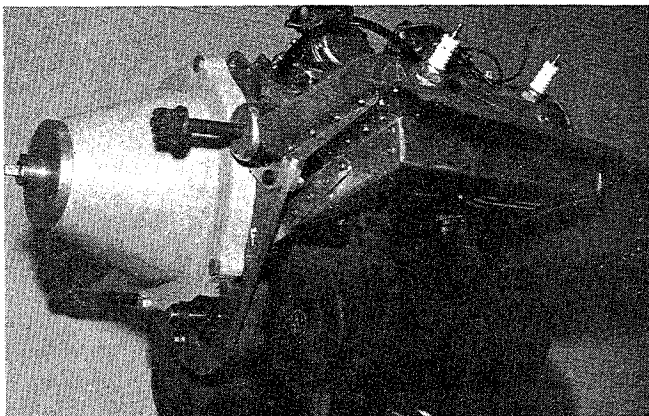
Fiberglass tach drive support which covers flywheel and ring gear
